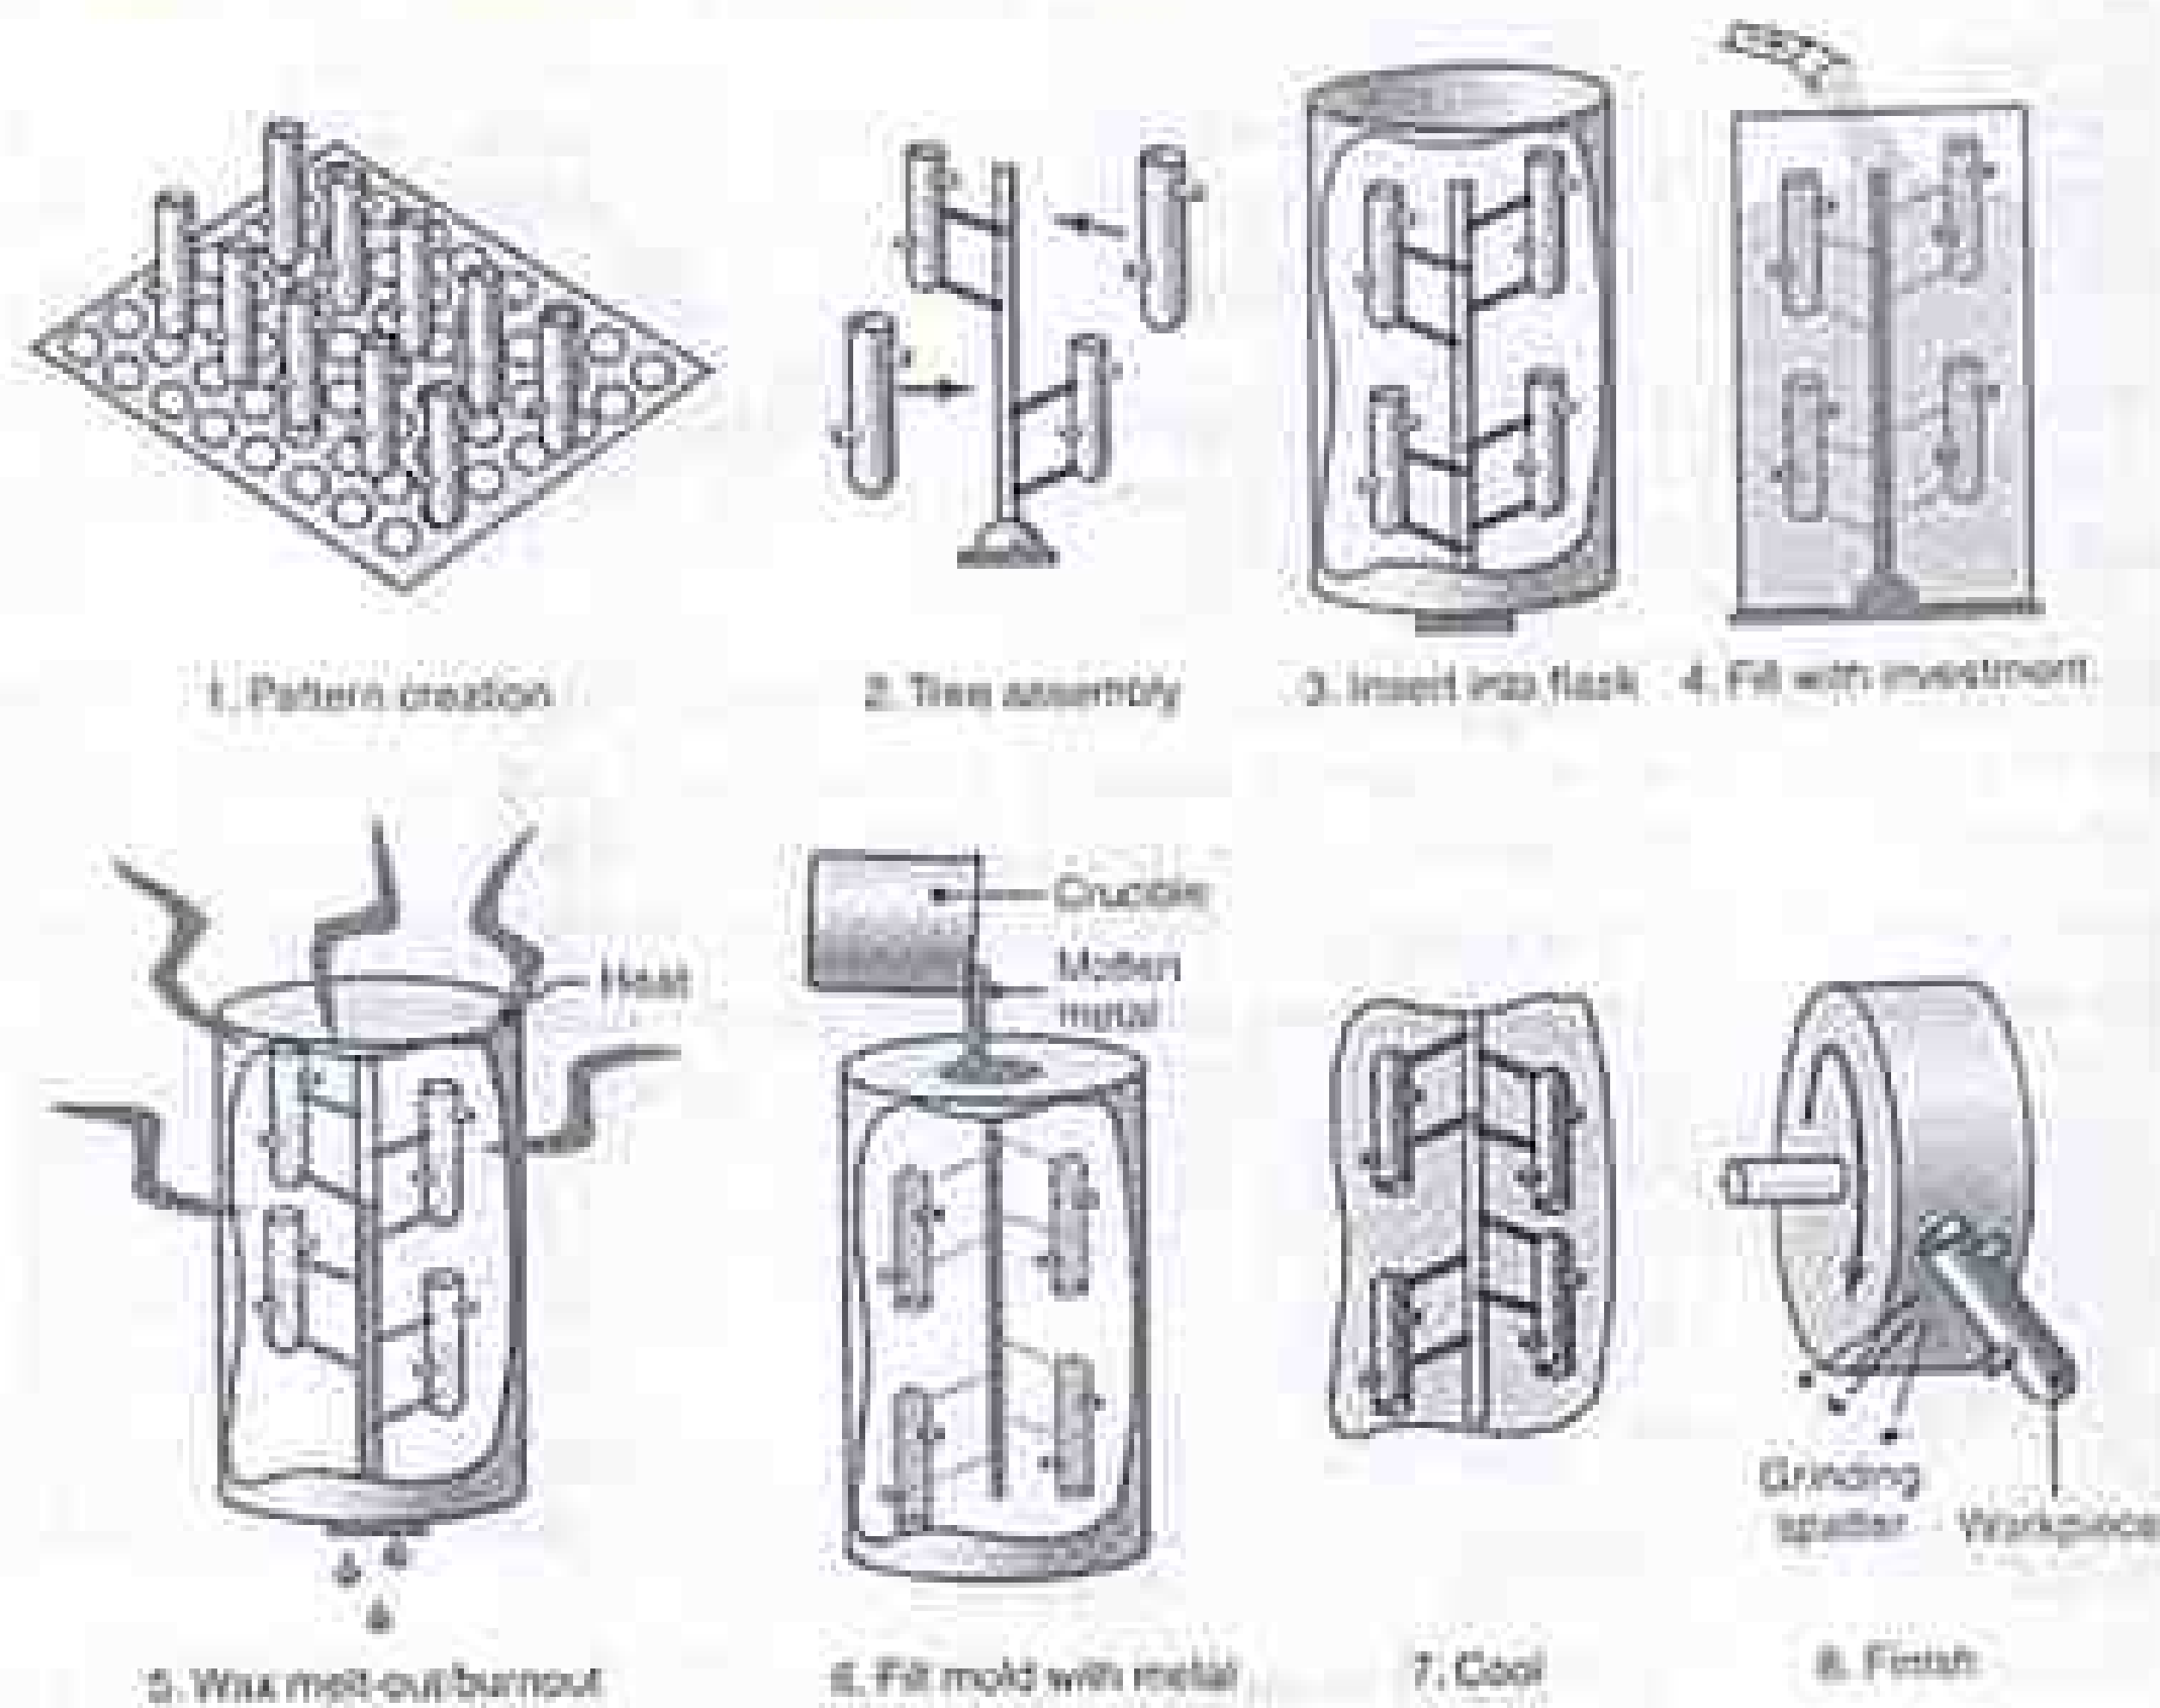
Manufacturing steps for investment casting with rapid-prototyped wax parts as blanks; this method uses a flask for the investment, but a shell method also can be used.
